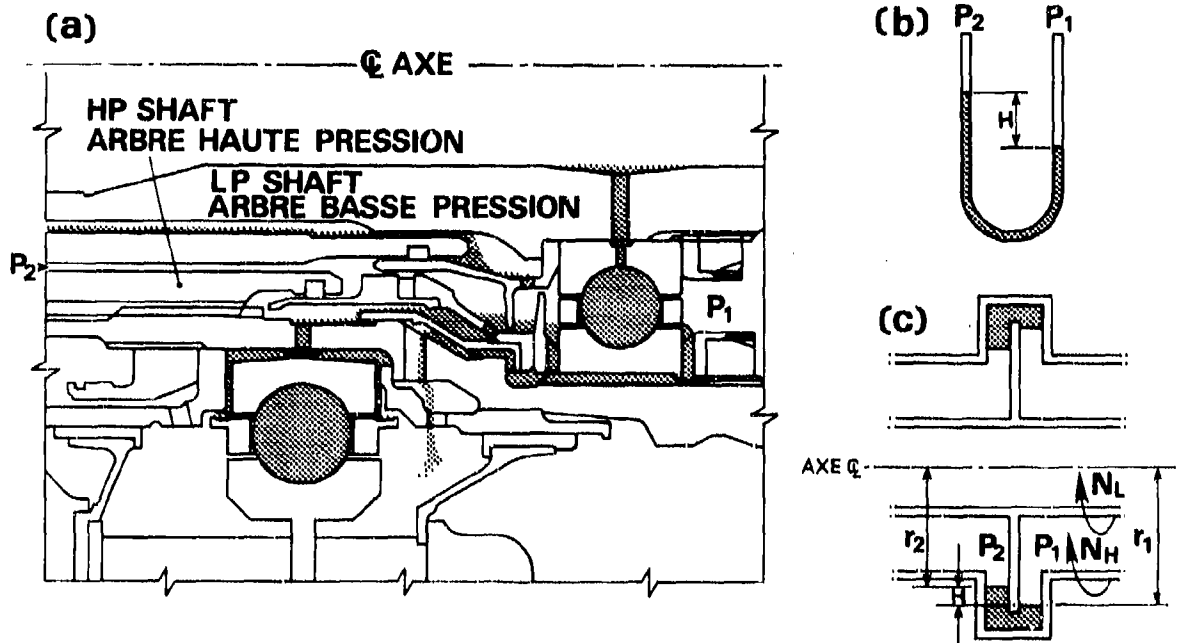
HYDRAULIC SEAL WITH DEFORMABLE WEIR
